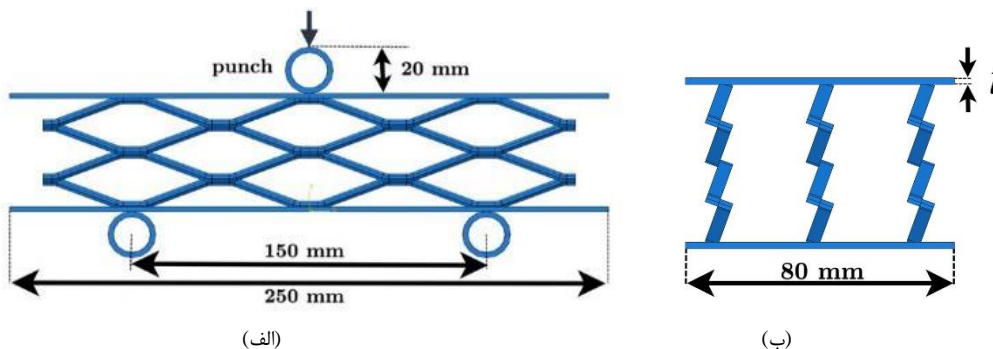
A schematic view of the sandwich beam sample a) front view and b) side view
